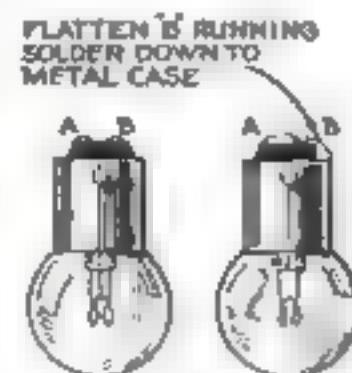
How to alter the soldering on a double contact bulb to make it single.
